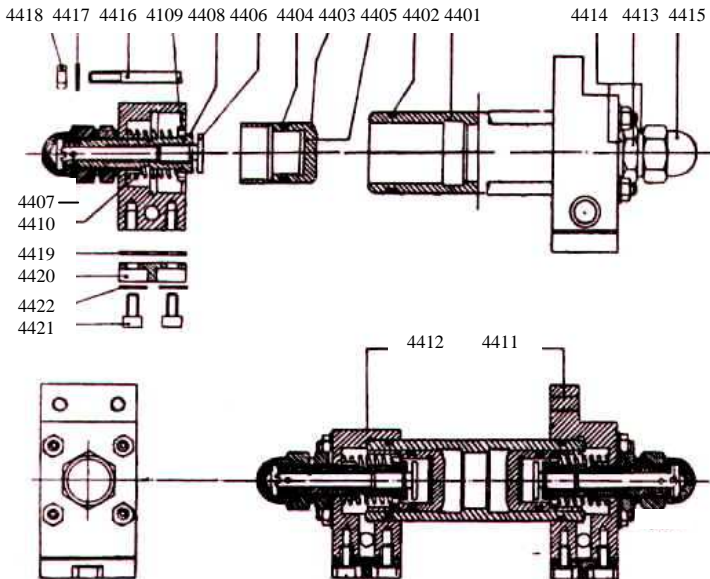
CONTROL CYLINDER ASSEMBLY
